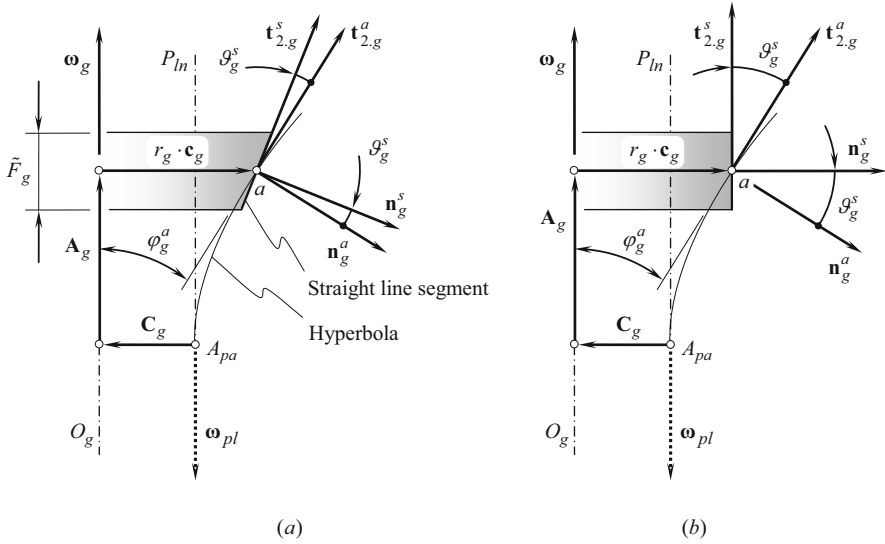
Axial profile of the gear generic surface approximated at point, a , by a straight-line segment that makes a certain positive angle, ϑ_g^s , in relation to the unit normal vector, \mathbf{n}_g^s : (a) conical gear, and (b) cylindrical gear
